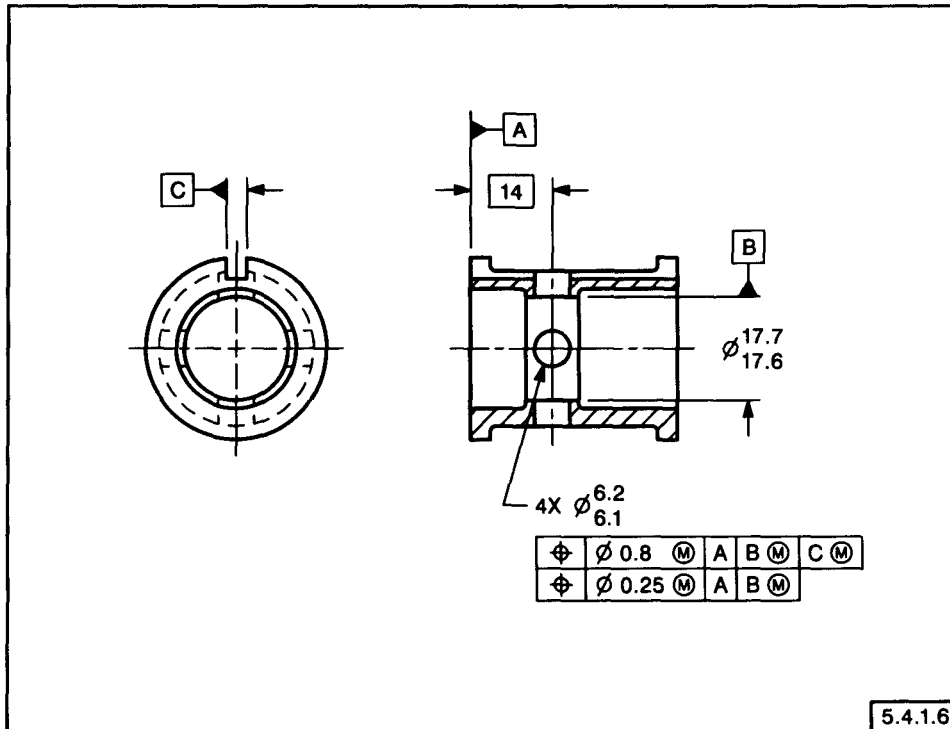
RADIAL HOLE PATTERN LOCATED BY TWO SINGLE-SEGMENT FEATURE CONTROL FRAMES
